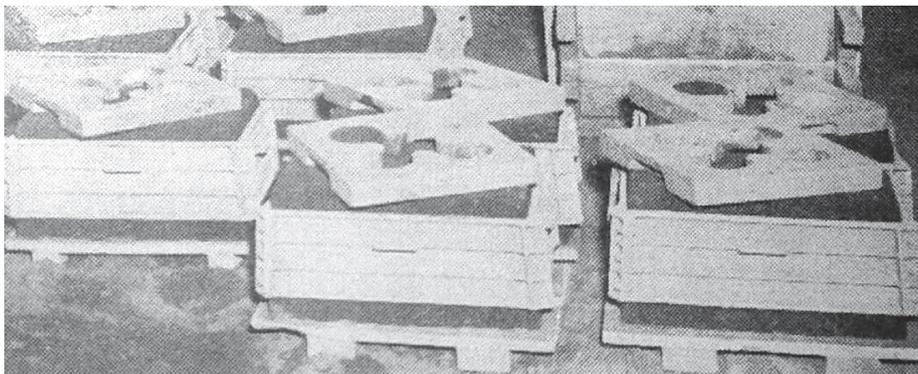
Weighted molds for pouring. The weights are used as a clamping device. Source: [2, p. 162].
